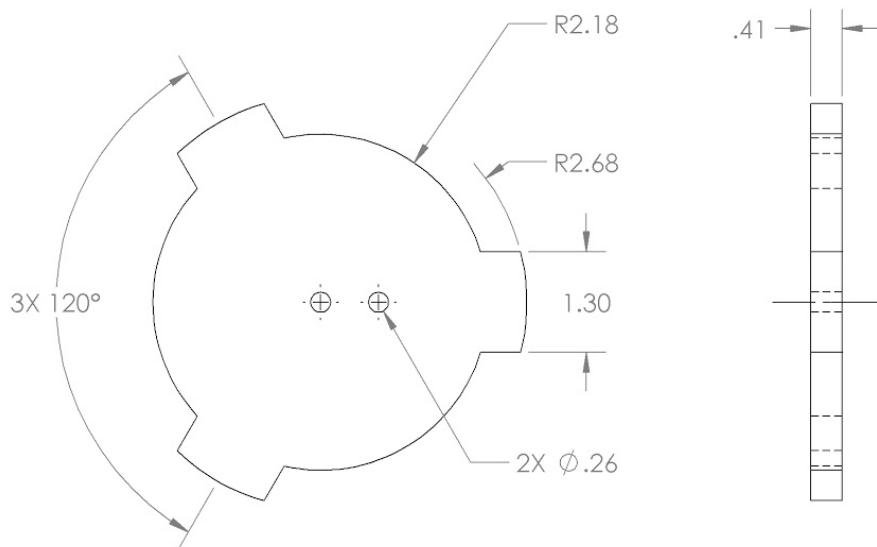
Locking Mechanism Bottom Inner Ring Drawing
